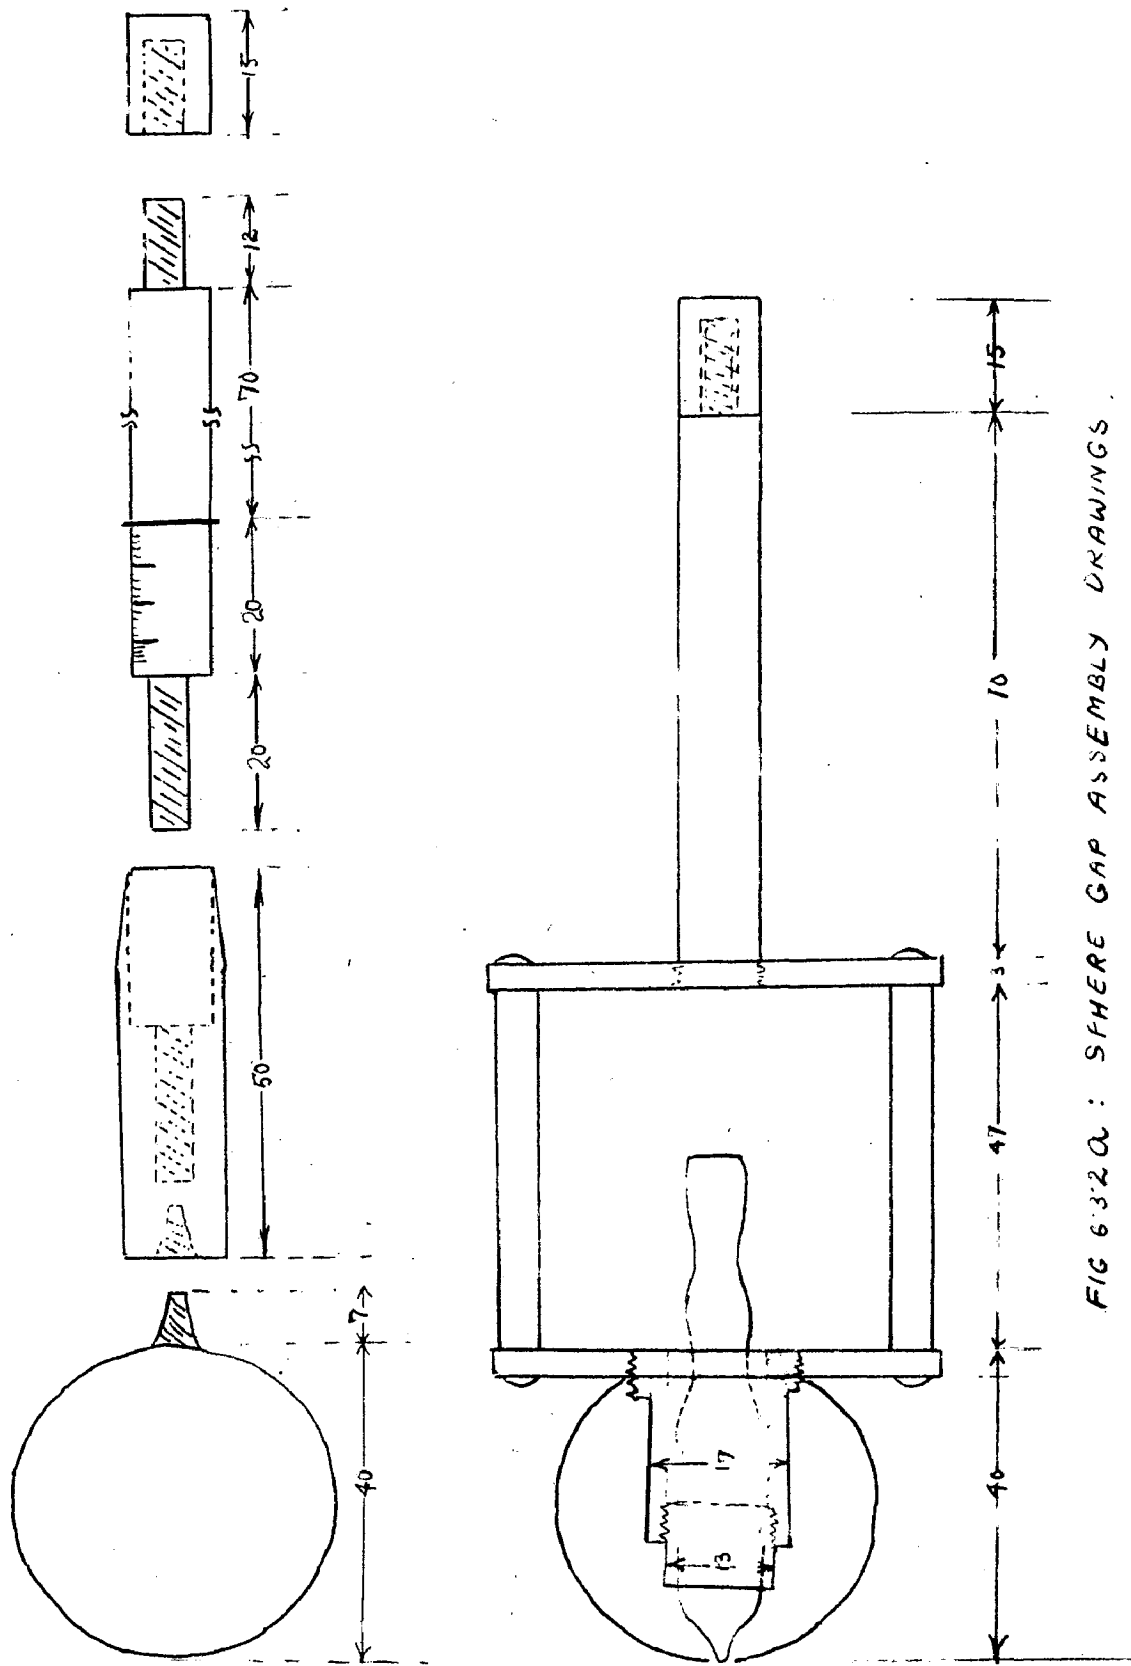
SPHERE GAP ASSEMBLY DRAWINGS .
